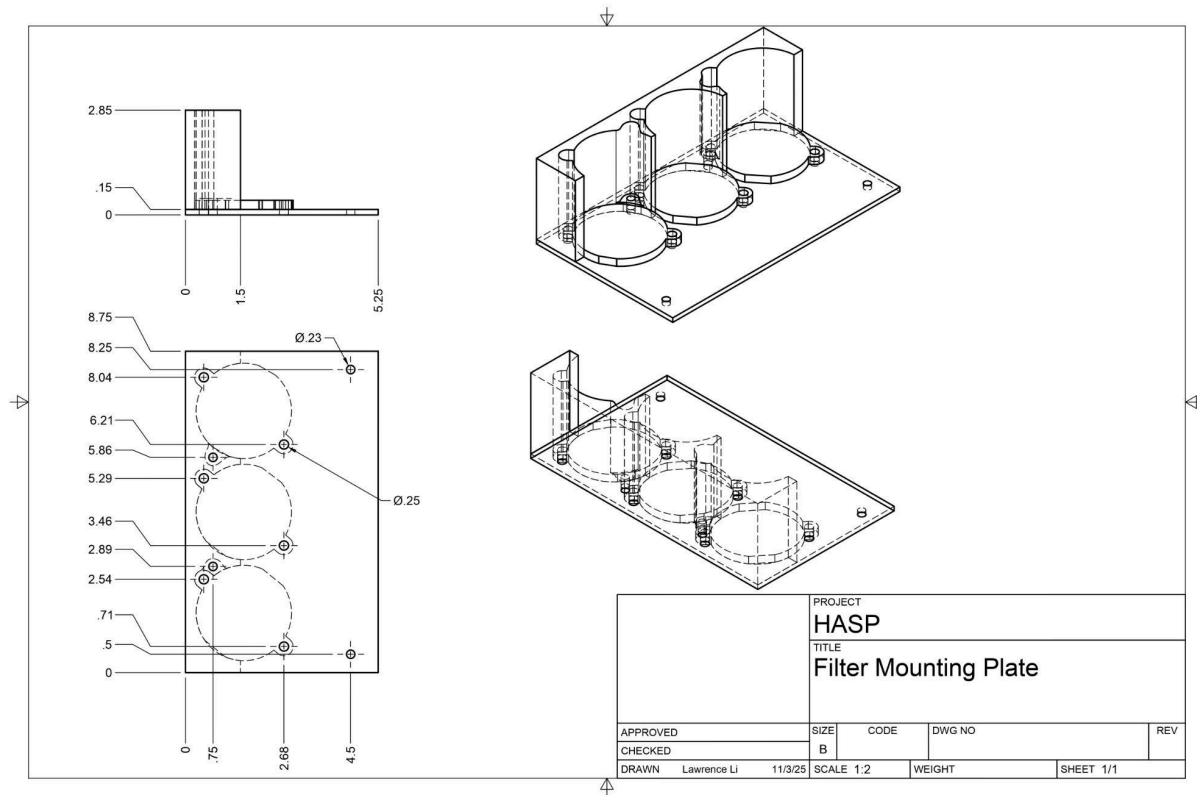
Engineering drawing of the mounting plates for the mini-MOUDI impactors
